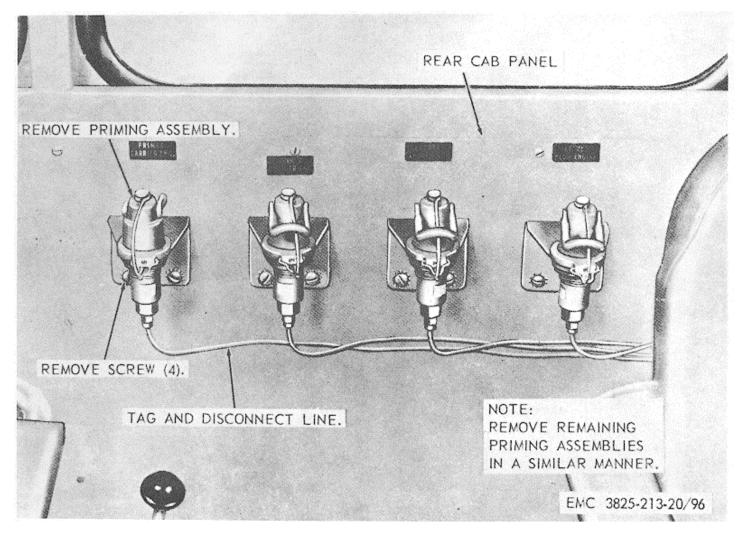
Plow carrier engine priming assemblies, removal and installation.
